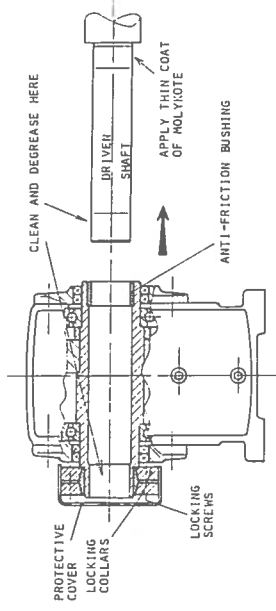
Mounting of Shrink-Fit Hollow Shaft Units
